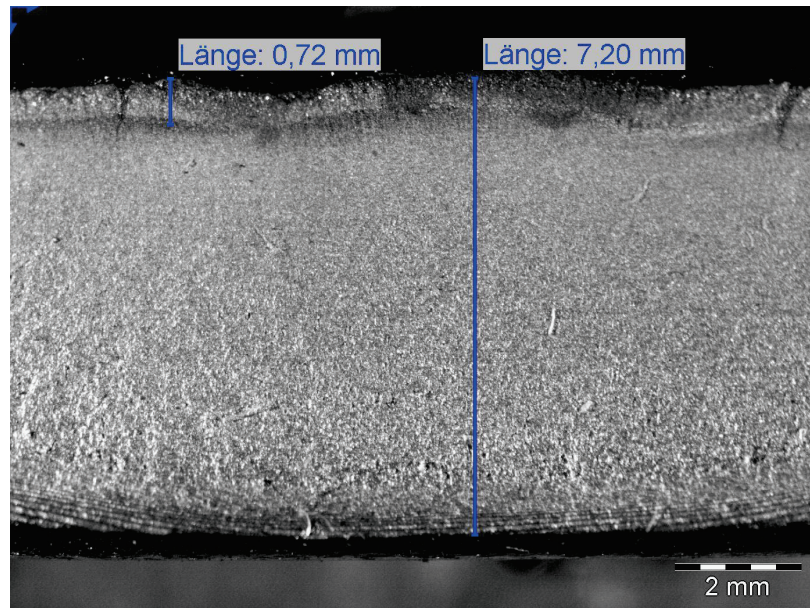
Fracture surface of specimen number 2 of S690 tests
